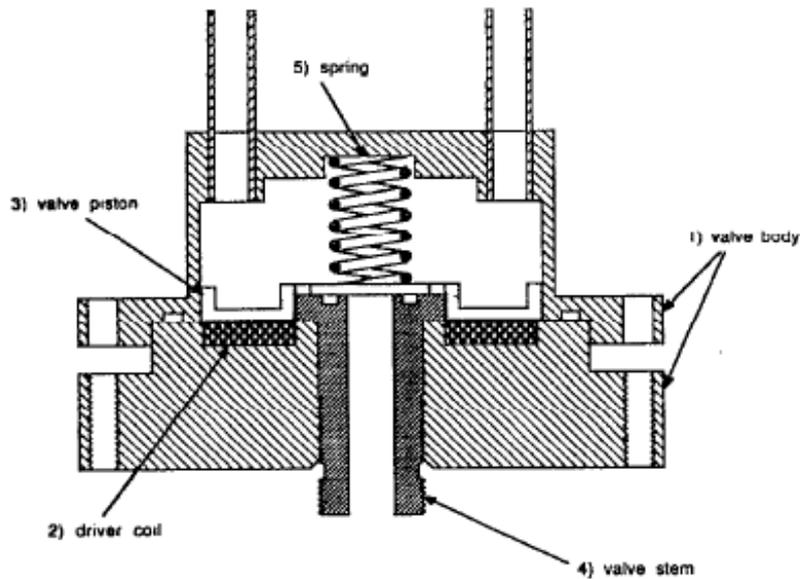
Schematic of the valve assembly: (1) valve body, (2) driver coil, (3) valve piston, (4) valve stem, (5) spring used to ensure a positive seal for any valve orientation.
